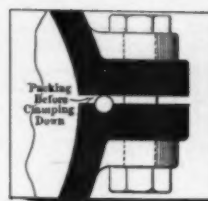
Section of a crankcase at the joint showing how to pack the same if it is desired to prevent wheezing and loss of lubricating oil
